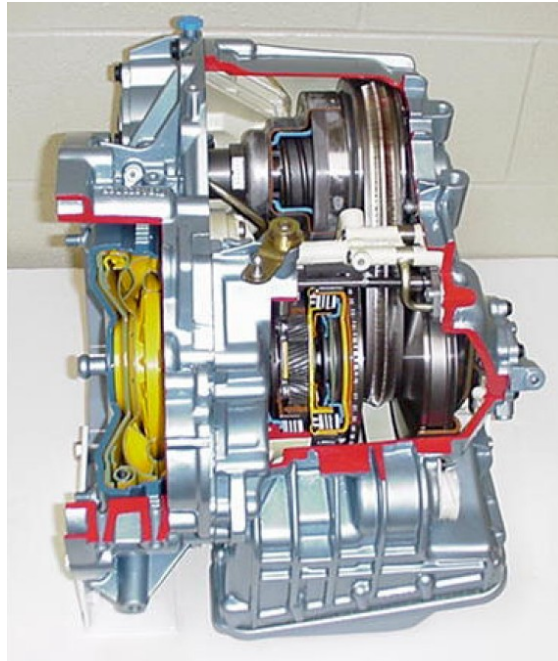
ZF CFT23 cross section [A.10]. Typical transverse front wheel drive application of the belt CVT layout. The short length is a real advantage for packaging in medium size vehicles.
